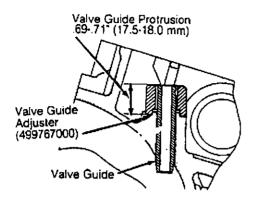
Positioning Valve Guide Adjuster On Cylinder Head Courtesy of Subaru of America, Inc.
